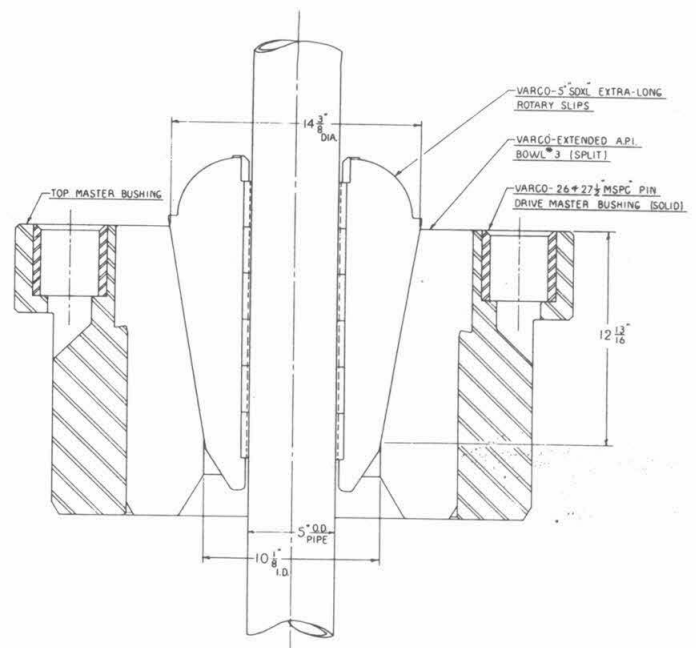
Cross section of VARCO Type SDXL rotary slips complete with 5-in. inserts set on 5-in.-OD drill pipe in a master bushing of a KMPC unit
